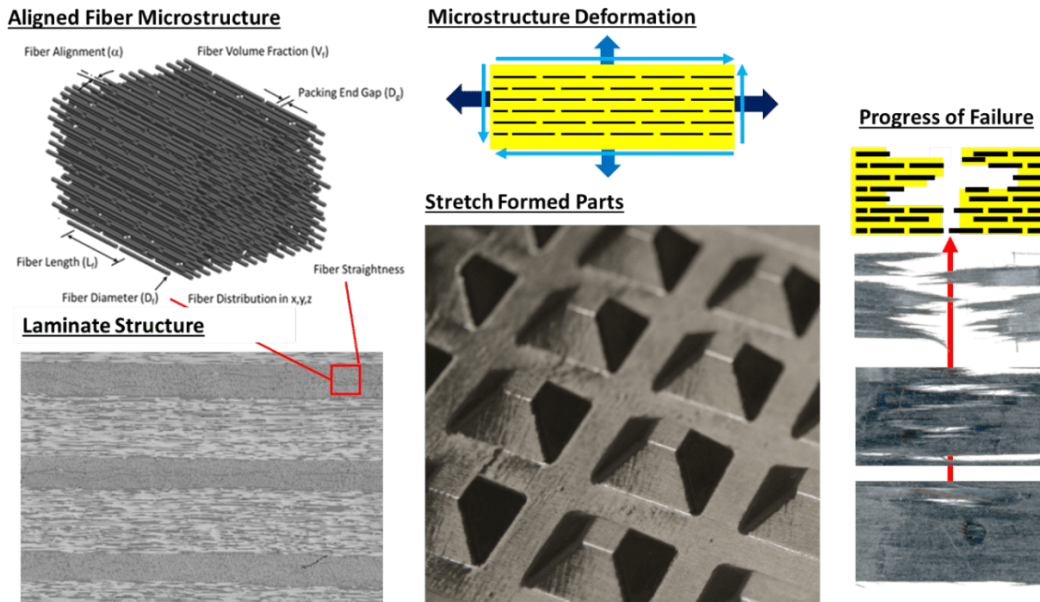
Aligned TuFF Fibers are prepregged and laminated to produce a flat blank [2]. Blanks are biaxially stretch formed to produce complex part geometry [3]. Material deformation during forming rearranges the ply microstructure. A forming limit will be defined by the influence of strain and strain rate on the material quality in the formed part
